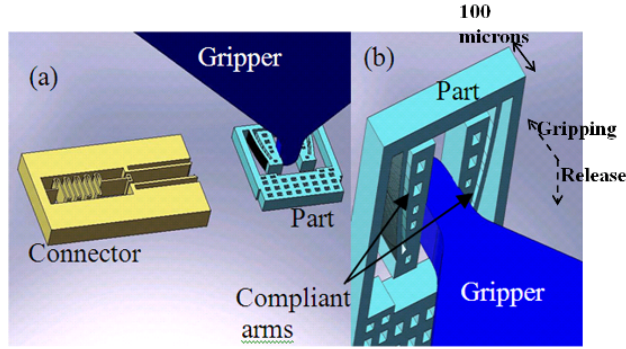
Microassembly. (a) Assembly scene (b) Compliant gripping on part.
